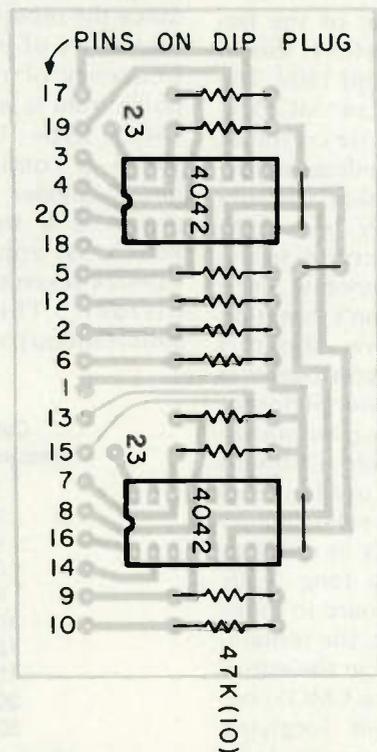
Component side of PC board, latch. Note: Pin 1 of 4042s is at bottom of layout.
